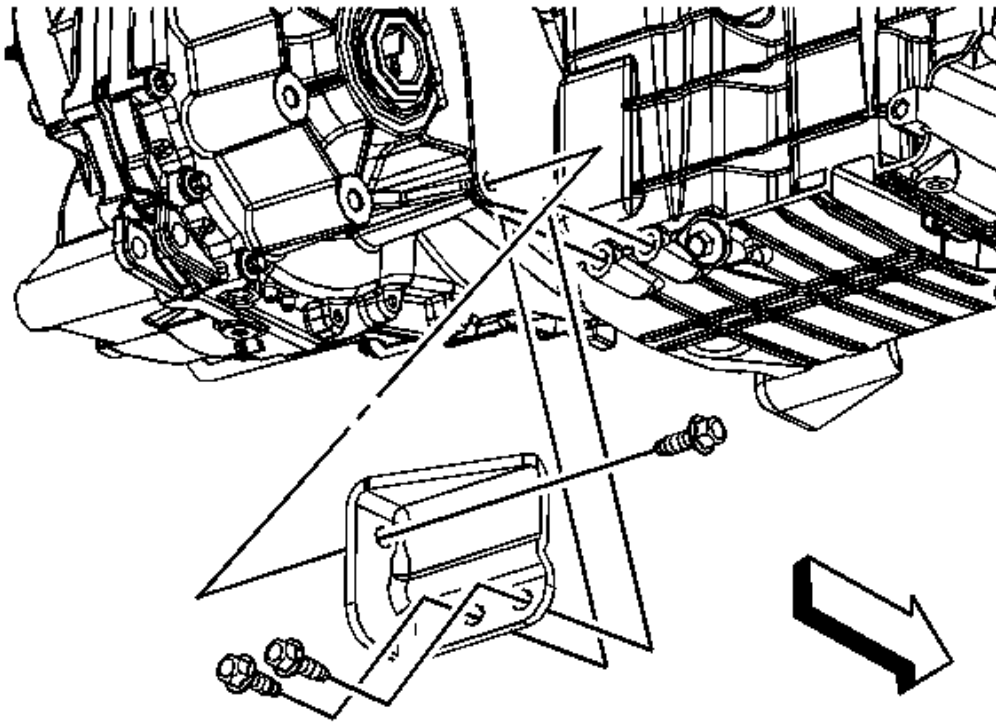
Transaxle Brace-To-Oil Pan & Bolts
